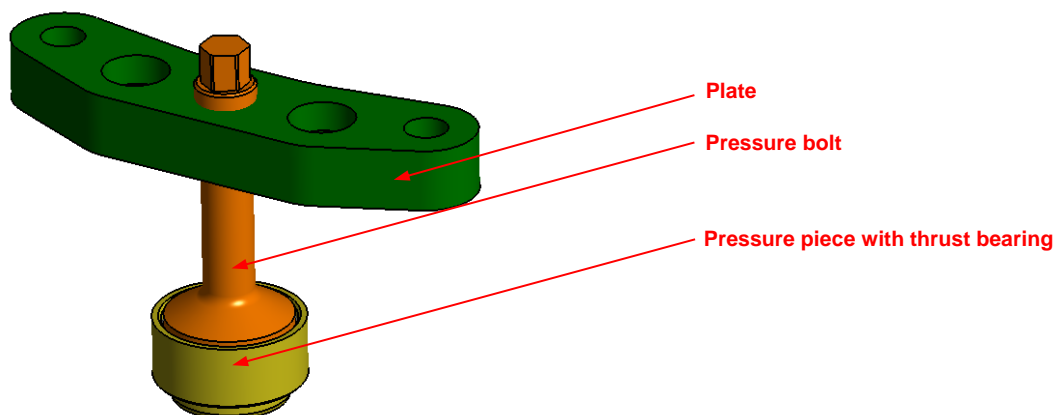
Pre-mounting of plate, pressure bolt and pressure piece
